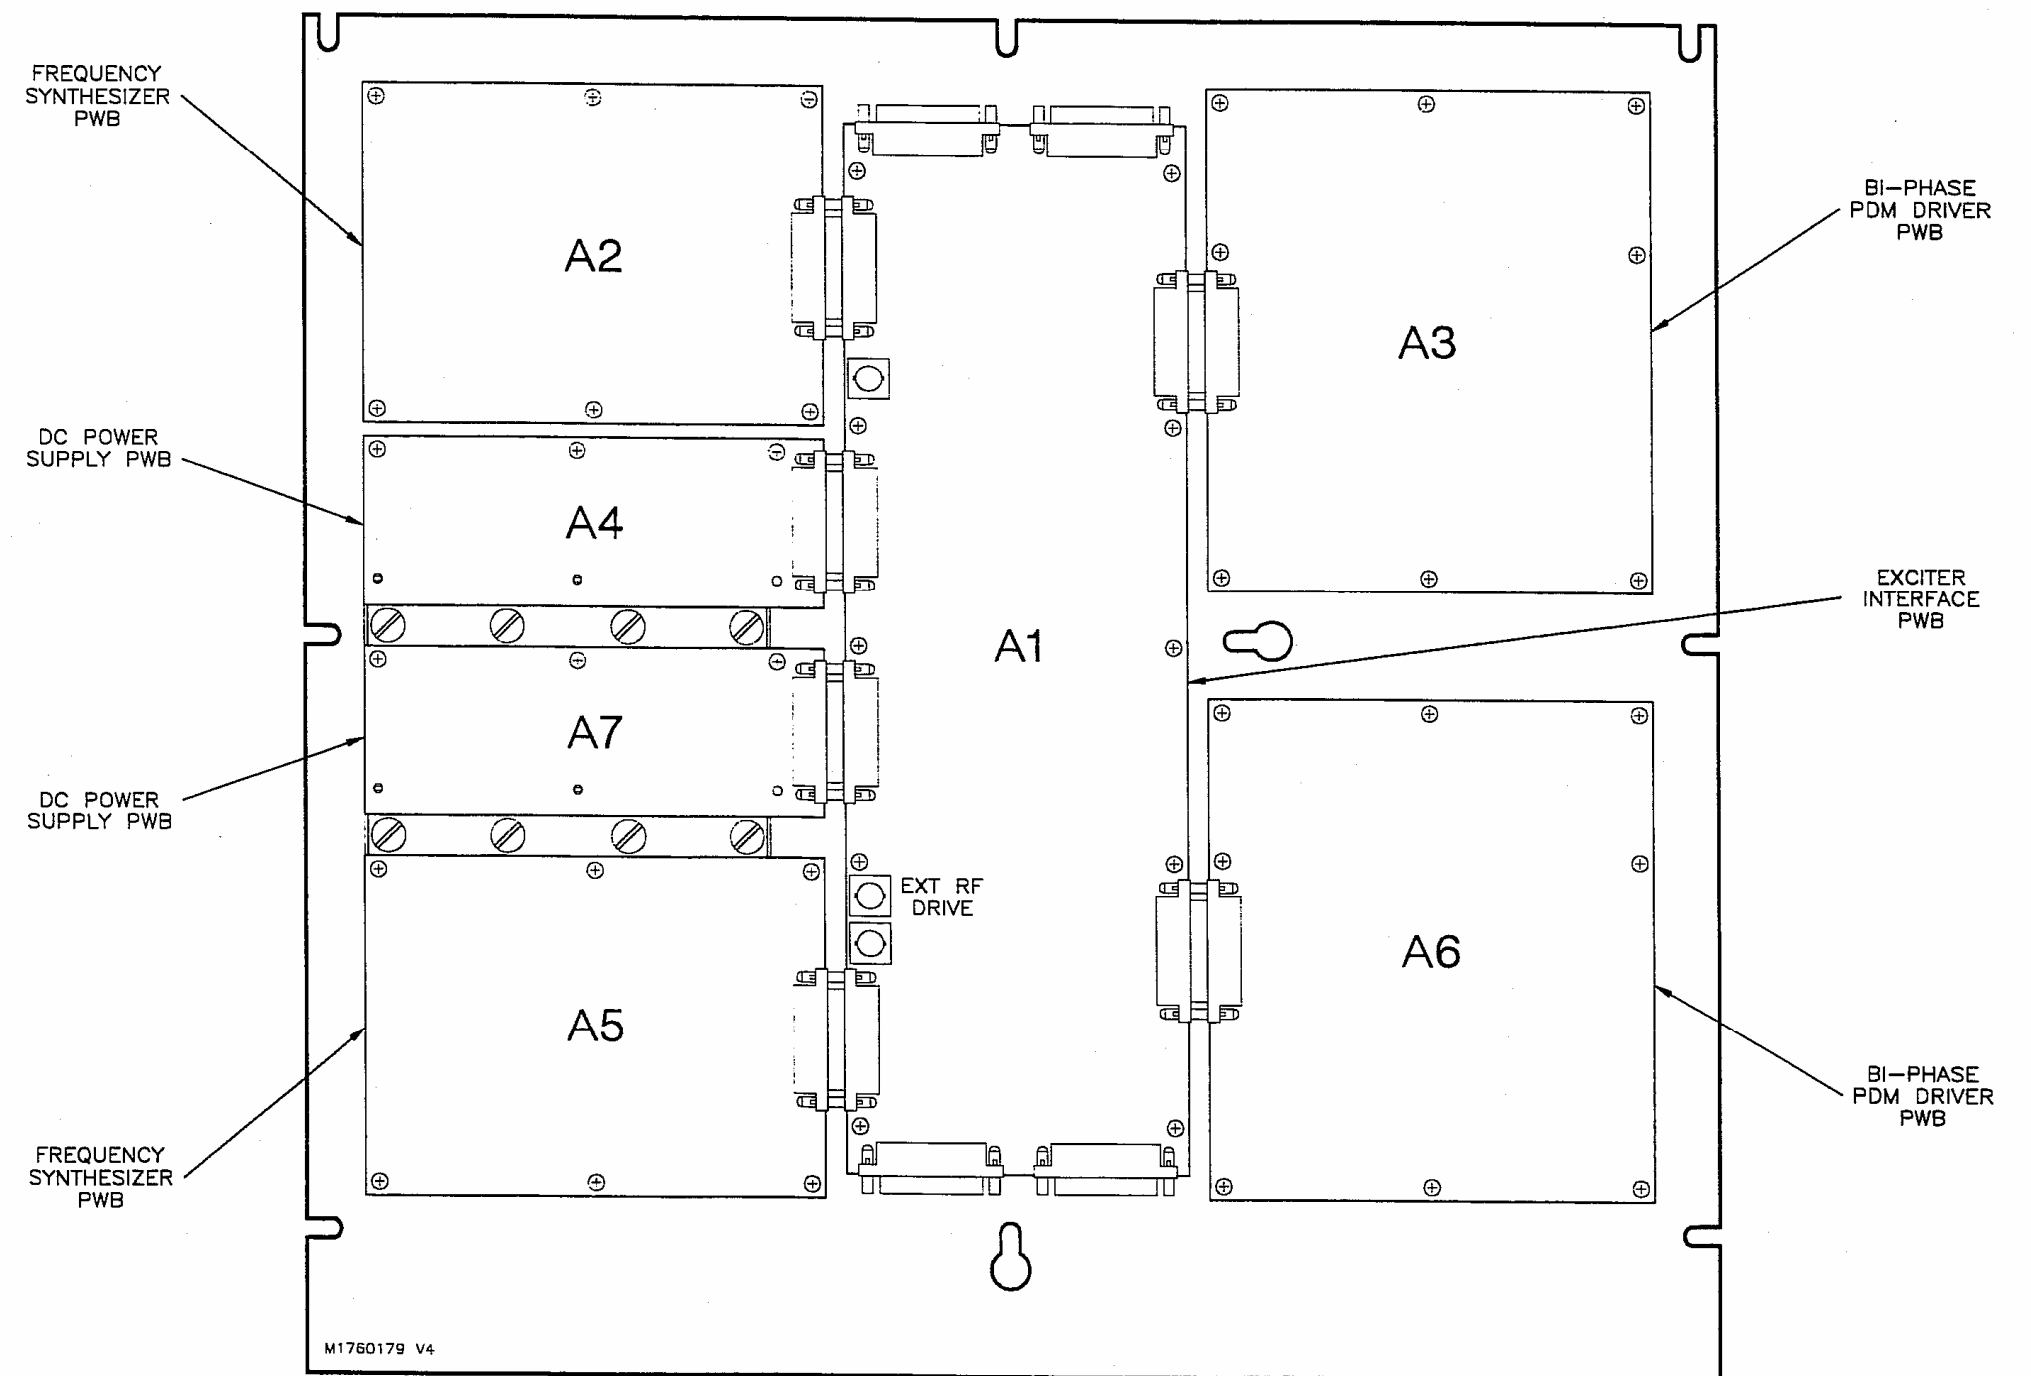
Assembly Detail – Exciter Panel (P/N 176-3100)
